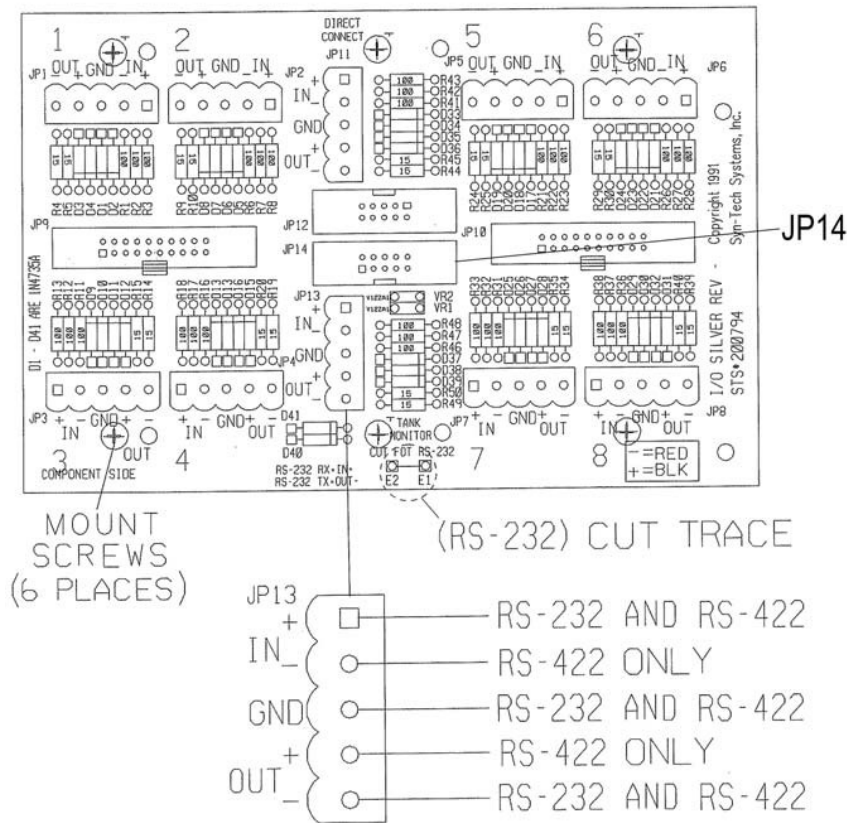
I/O Silver Board for Tank Monitor Interface Kit
